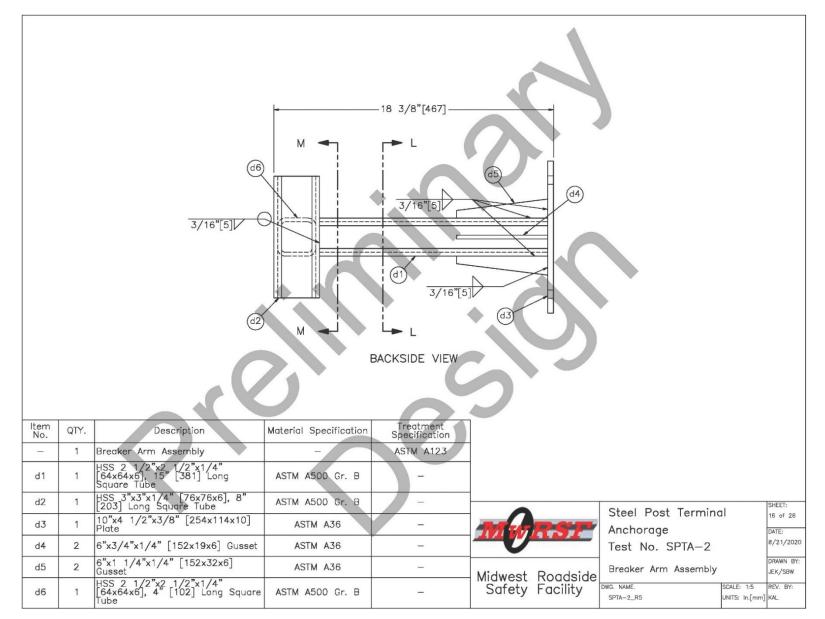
Breaker Arm Assembly, Test No. SPTA-2
